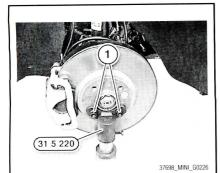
Secure special tool 31 5 220 with wheel bolts (1) to wheel bearing and support swivel bearing with workshop jack
